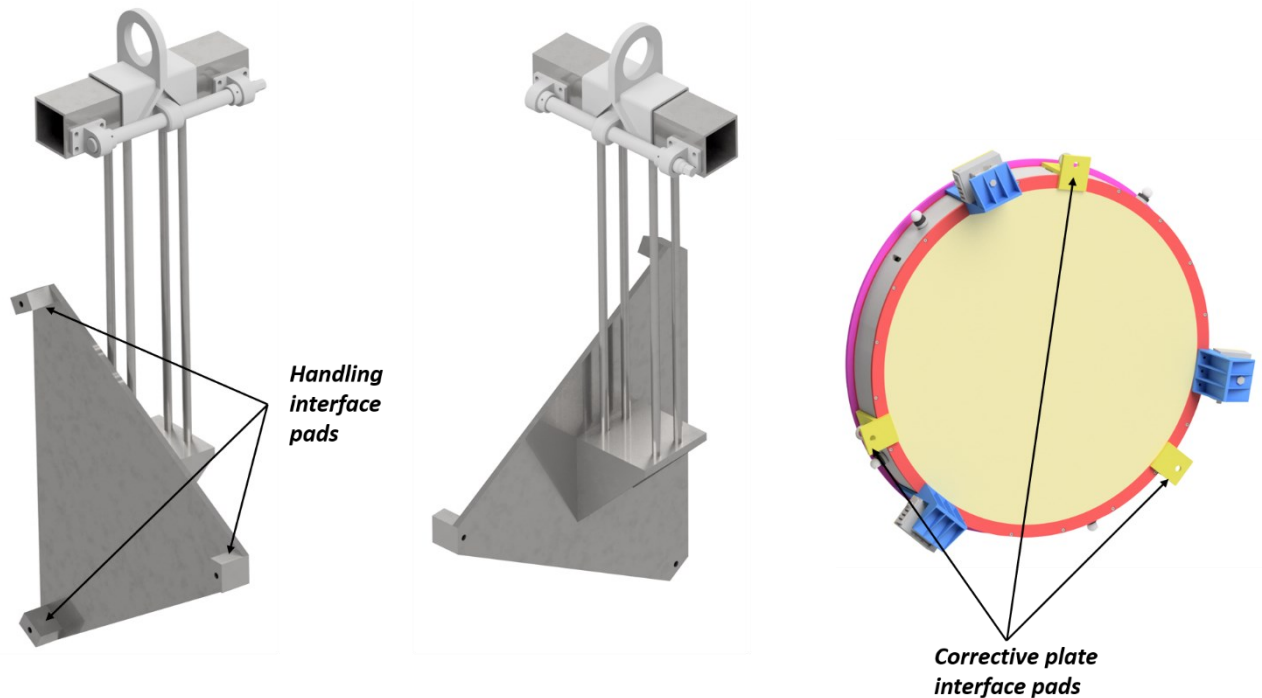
C-shaped handling for corrective plate installation. The interface between the corrective plate and the handling is between the 3 pads on the handling. The handling is equipped with a hook hoisting connection point having the possibility to slide, in order to have it aligned with the barycentre of the system both when M6 is connected and disconnected.
